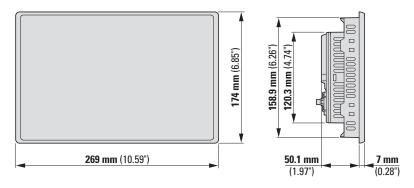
Dimensions for 10.1" front mounting devices in mm (inches)
